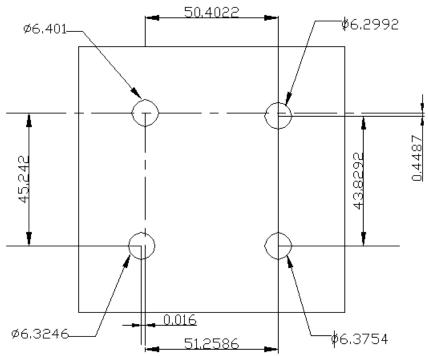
Component Dimensions Of Jig Plate KARPAGAM ACADEMY OF HIGHER EDUCATION
